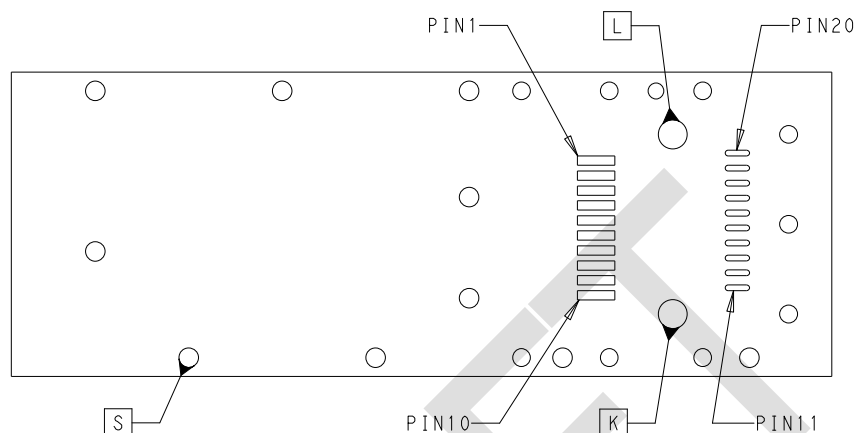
1x1 Connector Design and Host PCB Pad Numbers
